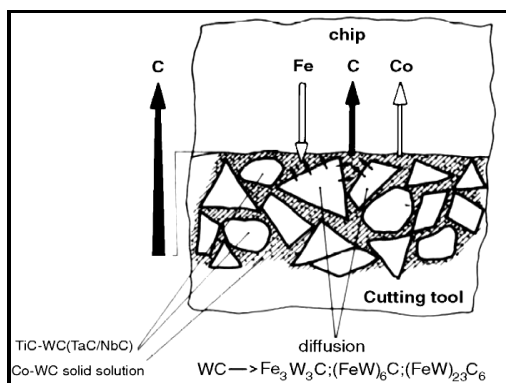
Material diffusion at the interface tool-workpiece [62]
